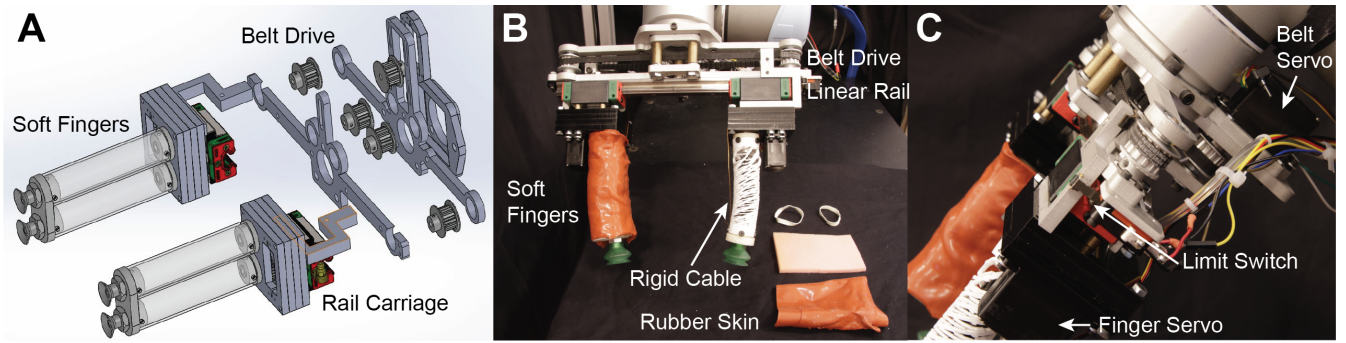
Gripper design schematics. (A) Design drawing illustrating the belt drive of the soft finger platforms on a linear bearing. (B) Front view of the gripper, with rubber covering on and off, showing limit switch wire. (C) Side view of the gripper, highlighting the belt system
